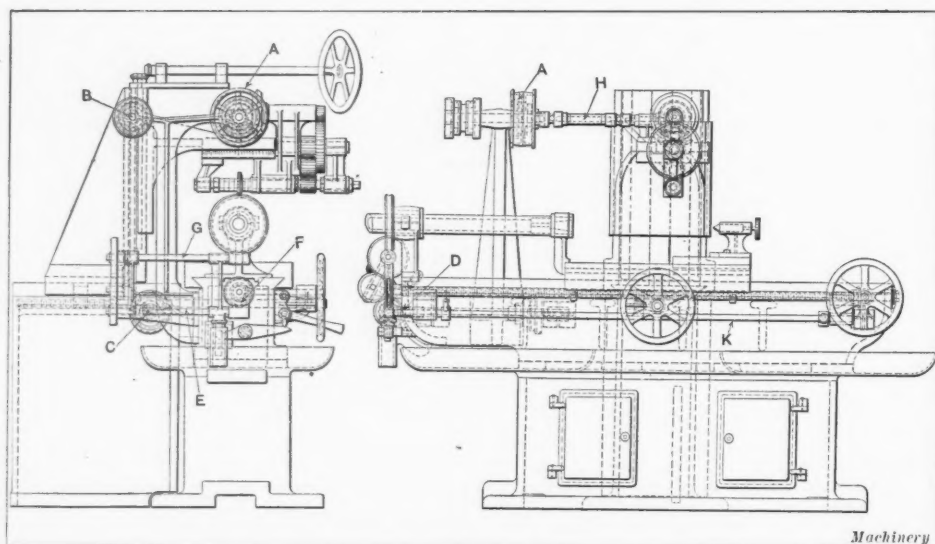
End View and Front Elevation of Bowen Milling Machine
